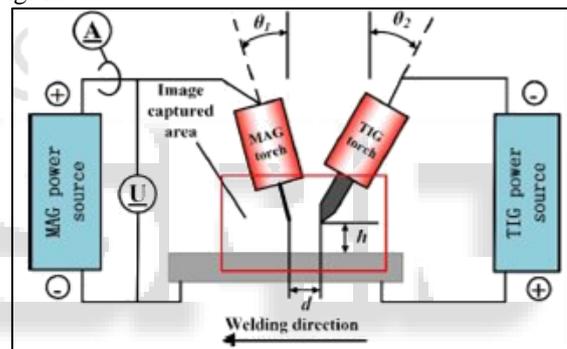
Experimental setup for TIG-MIG hybrid welding
